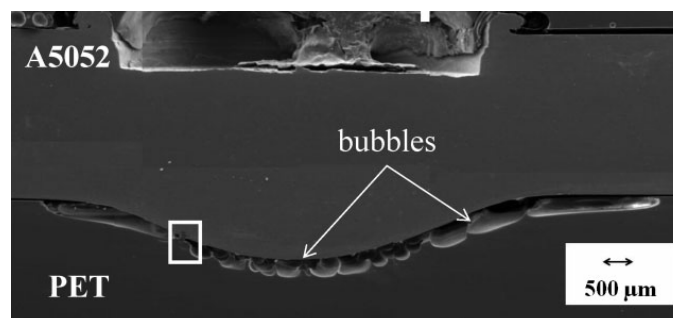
A cross-sectional view of an A5052/PET specimen, showing the bubbles formed in the plastic material [64].
